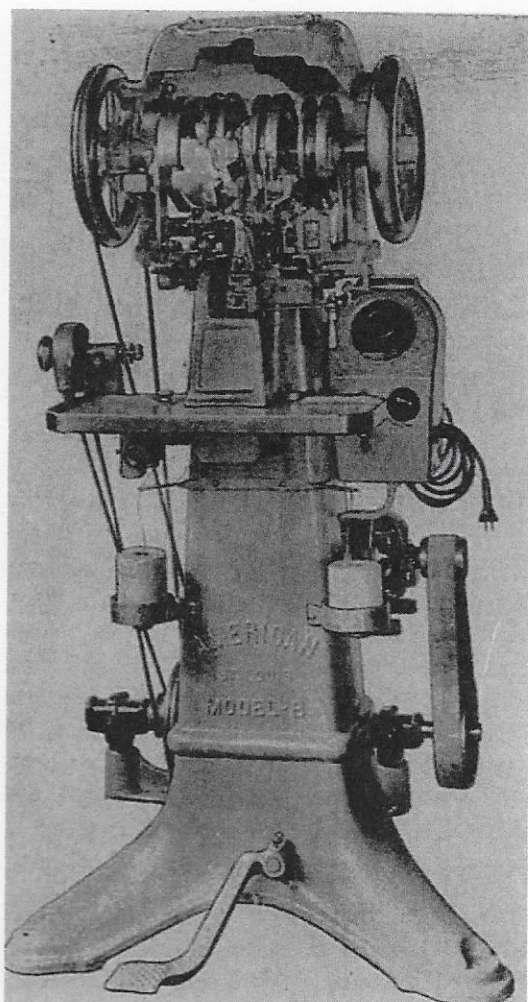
American model B sole stitcher. (Cam cover has been lifted to show operating mechanism of the stitcher head.) American models C and CA (not shown) are similar to this model in appearance.
